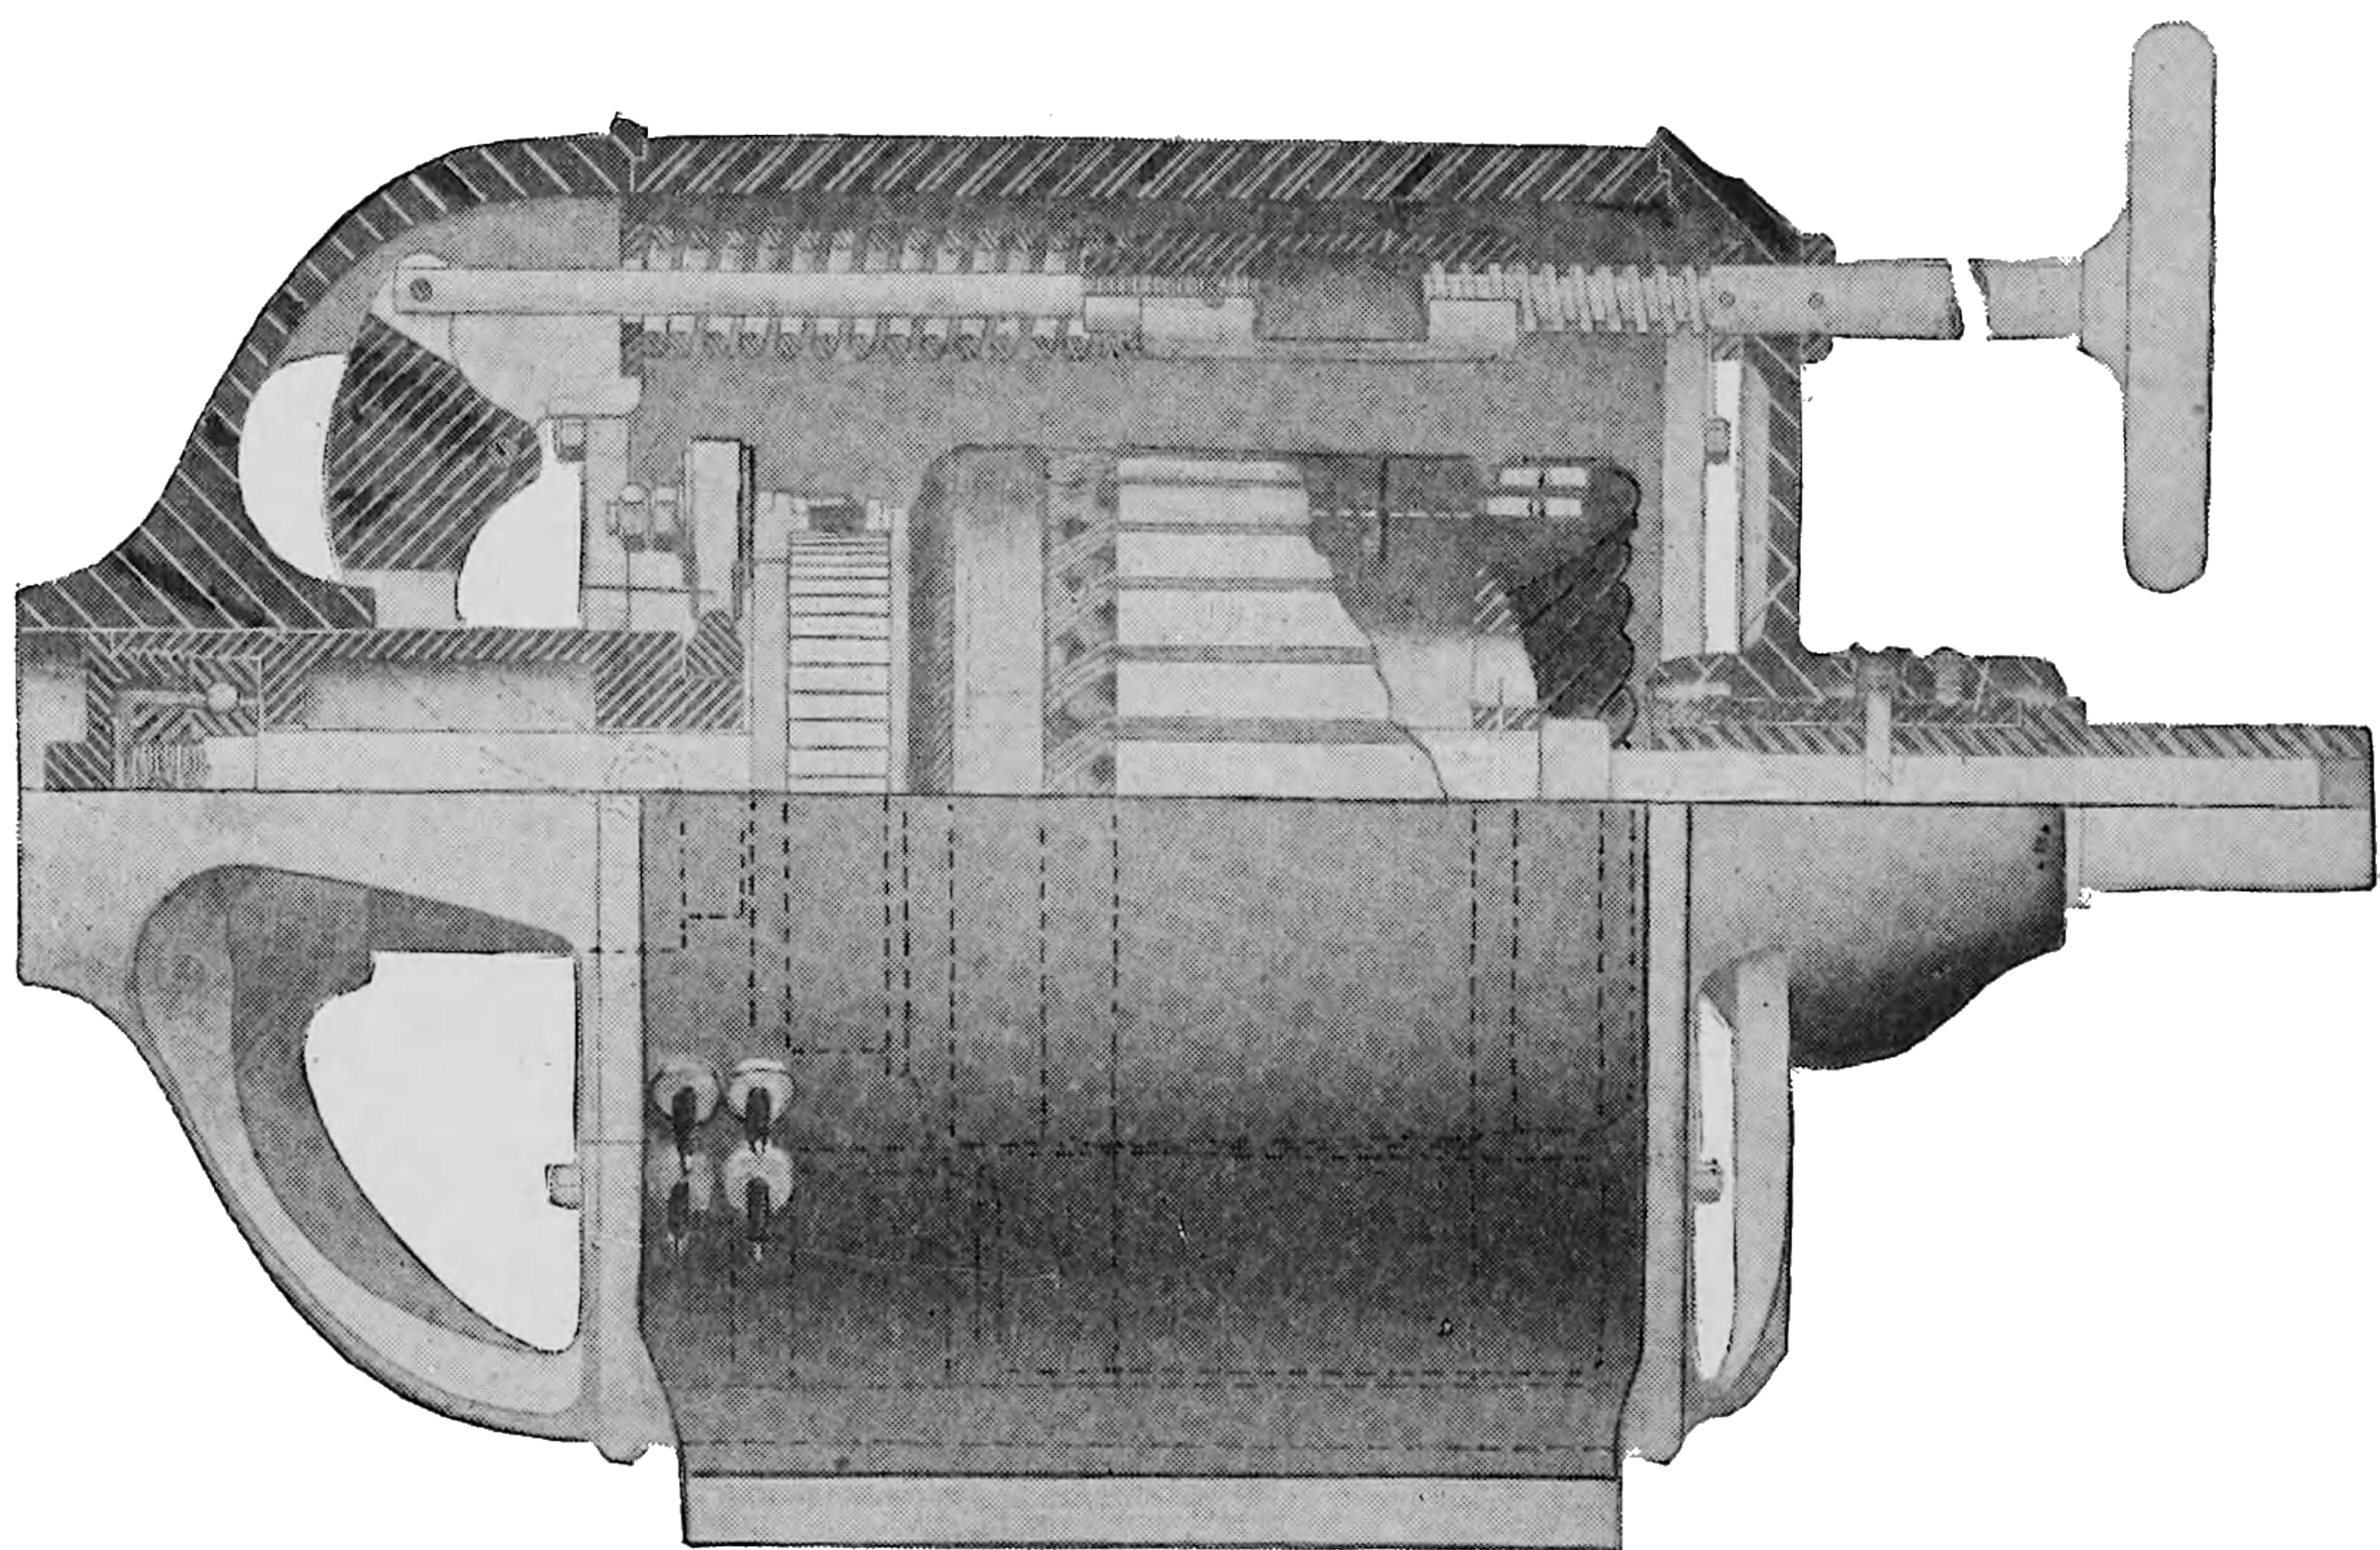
Part Section of Reliance Adjustable Speed Motor
